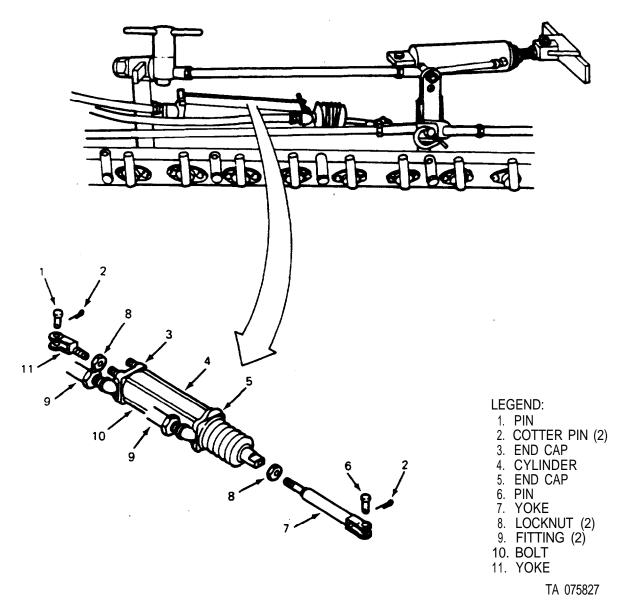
Remove/Install Bottom Bar On-Off Cylinder.
